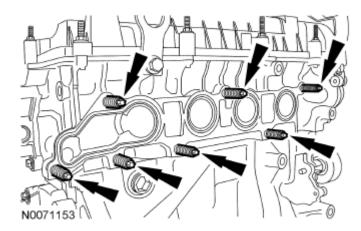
Locating Exhaust Manifold Studs Courtesy of FORD MOTOR CO.
